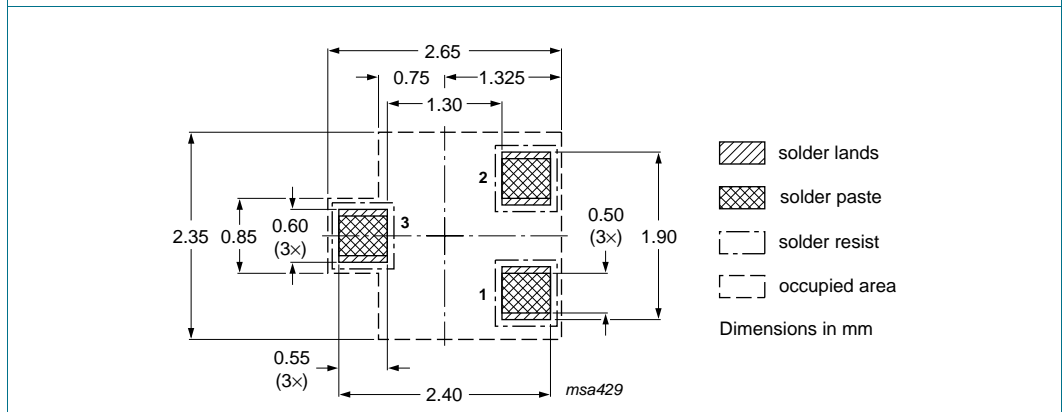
Reflow soldering footprint BAV70W (SOT323/SC-70)
